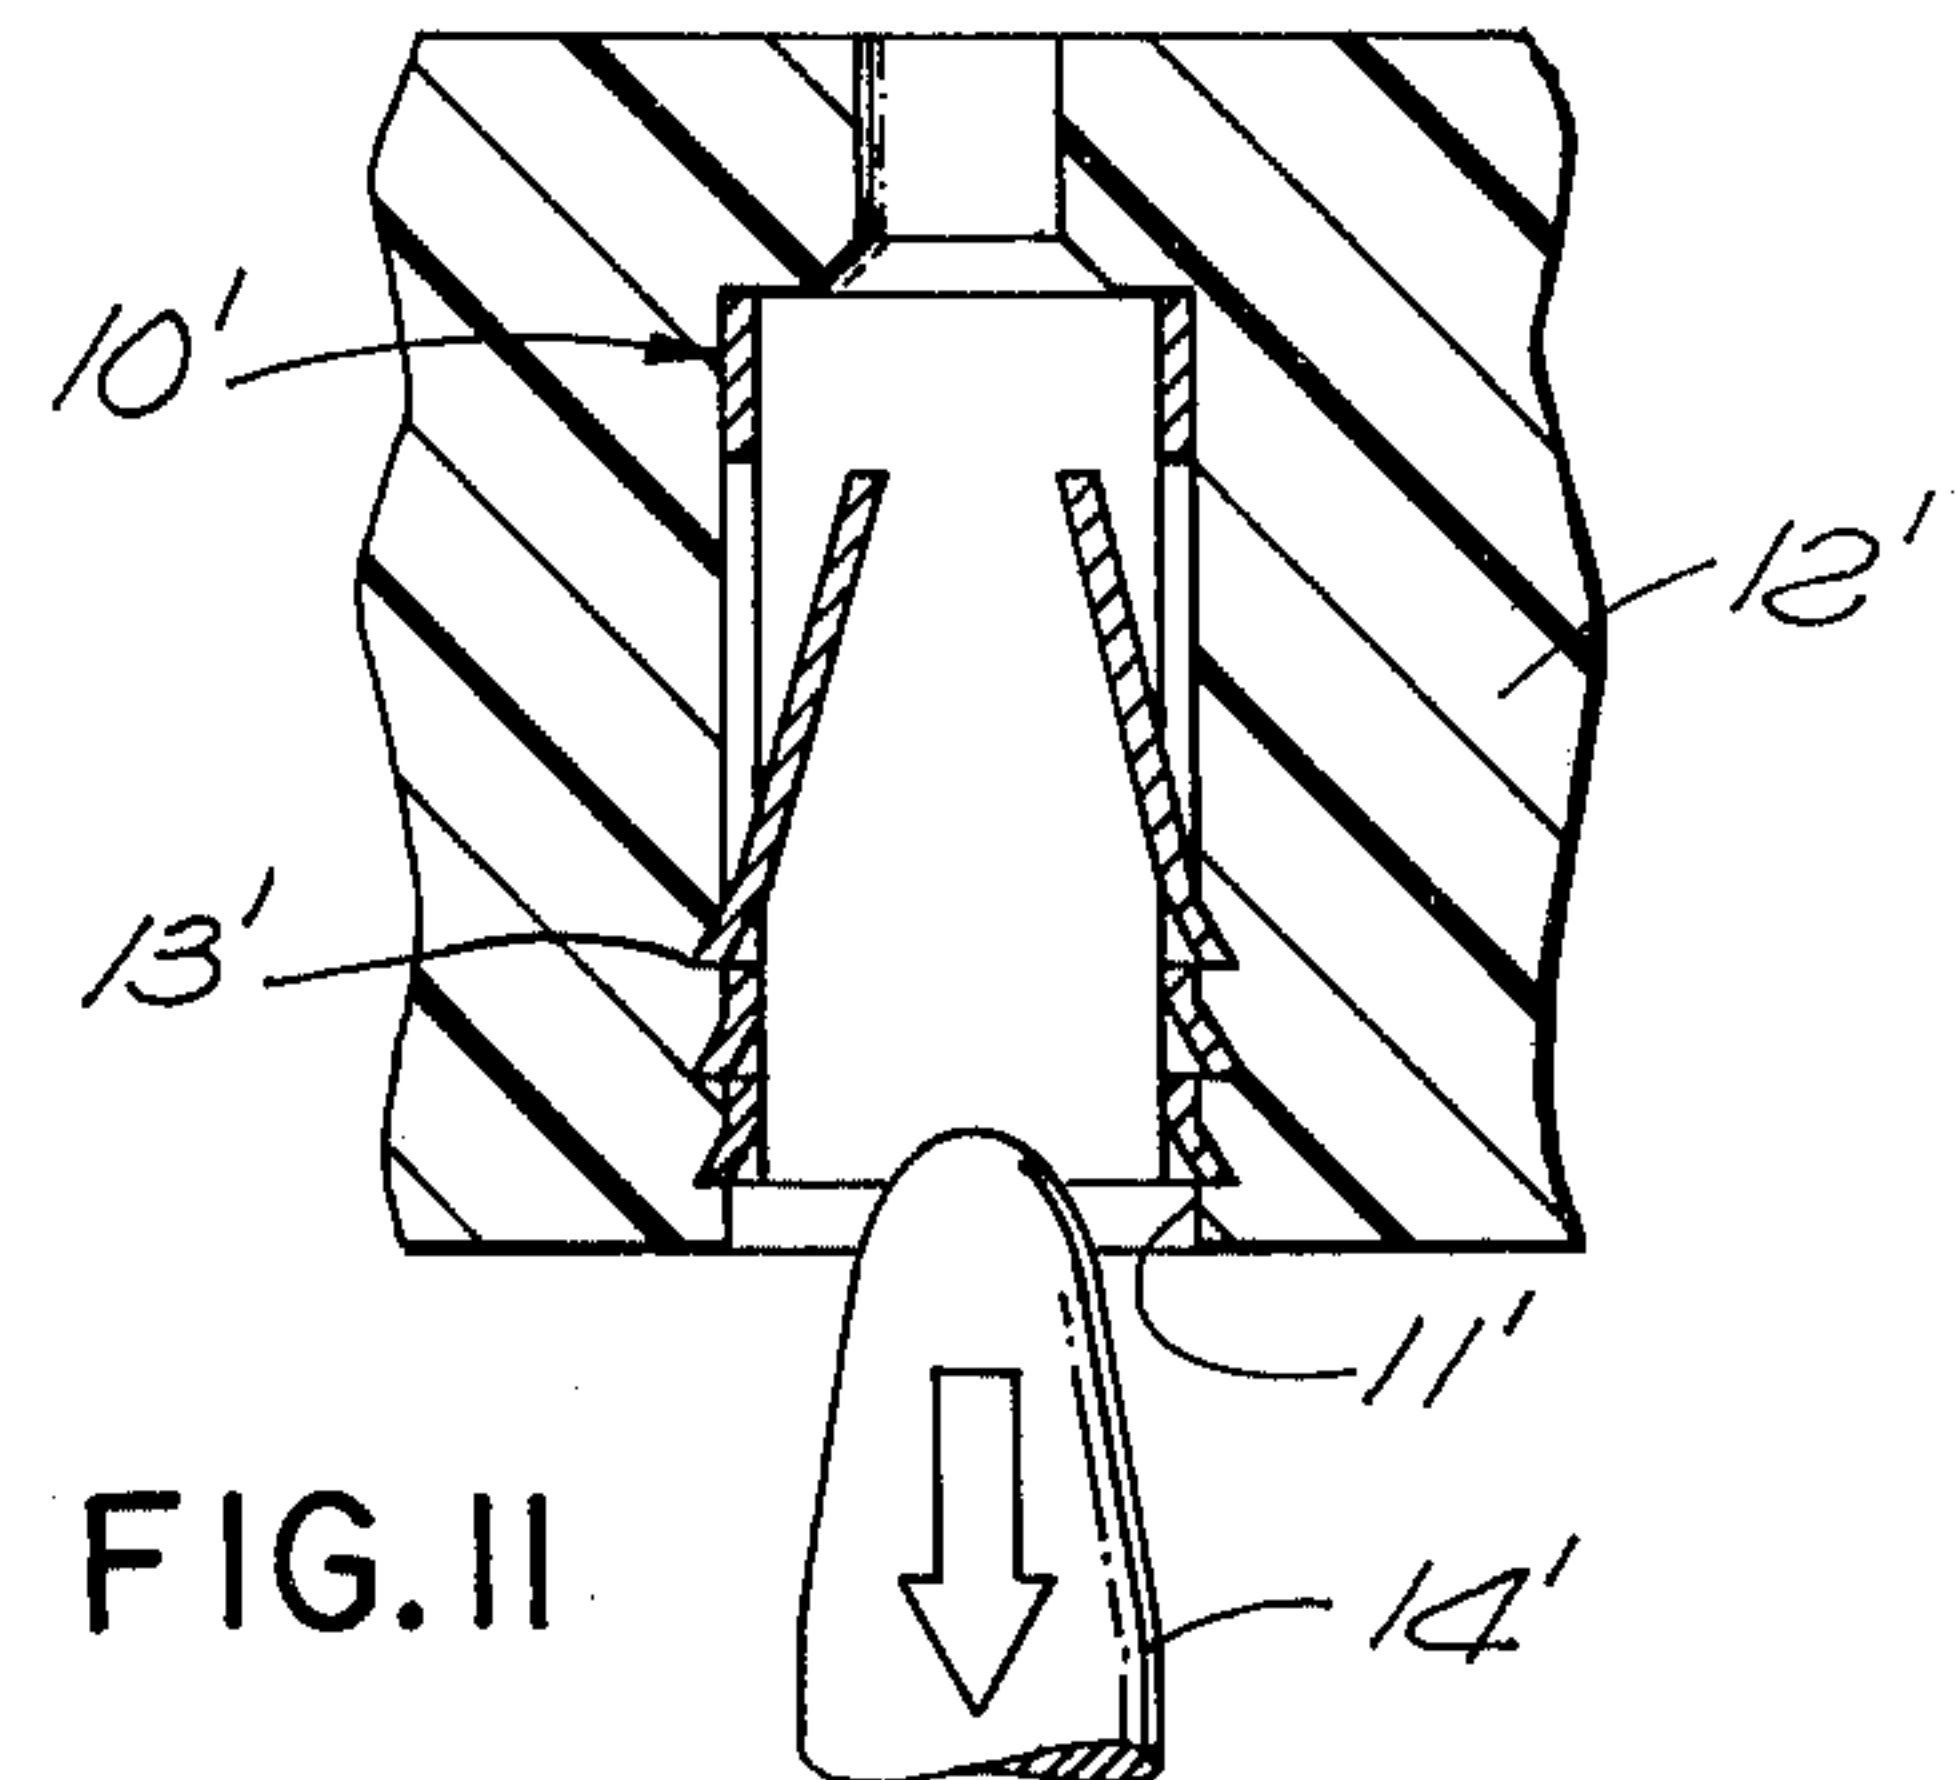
STEP 4: REMOVE PROBE. BARBS RETAIN CLIP IN CAVITY.
